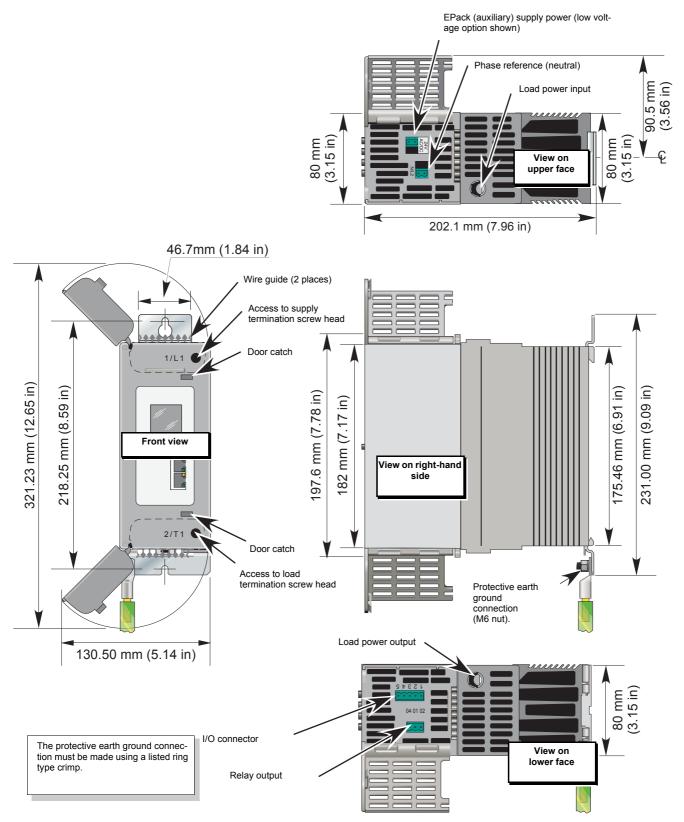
Mechanical installation details (80A to 100A units) (doors open).
